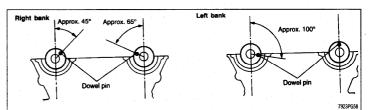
Proper positioning of the camshaft knock pins—3.0L DOHC engine
